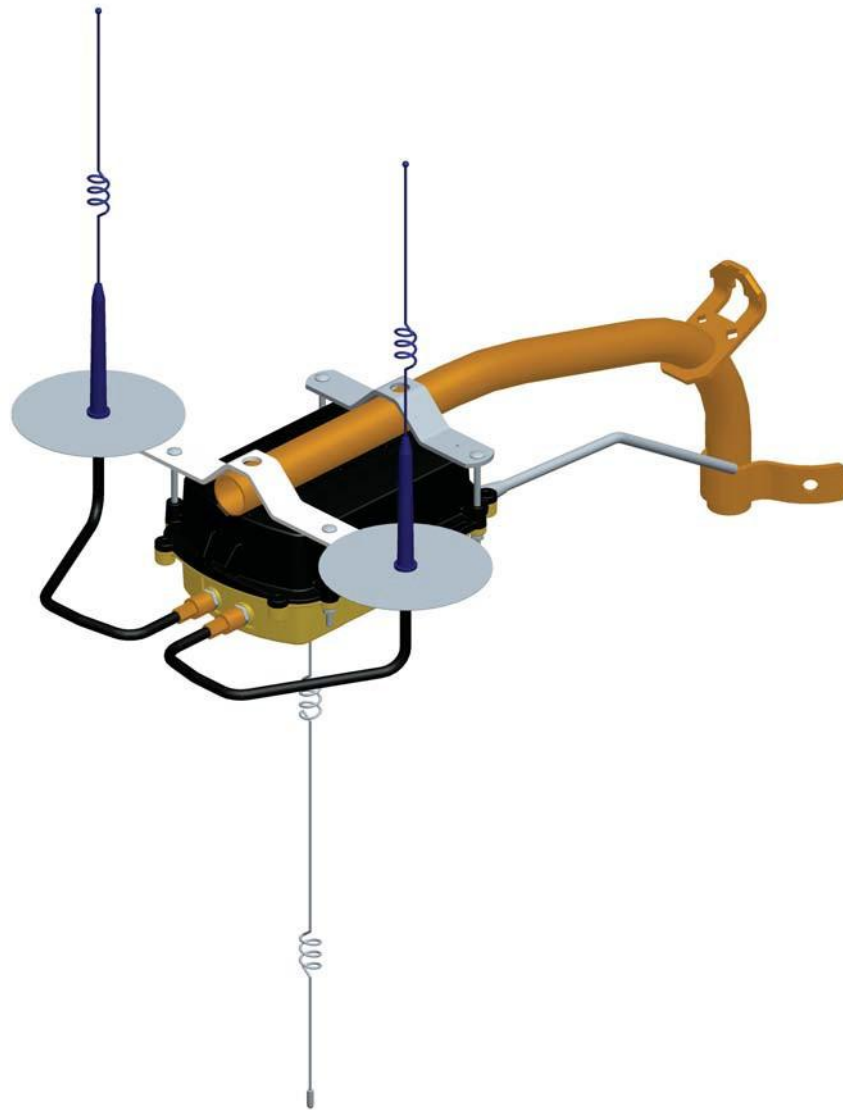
3. Built-out wood mounted concentrator assembly illustration, view from top
